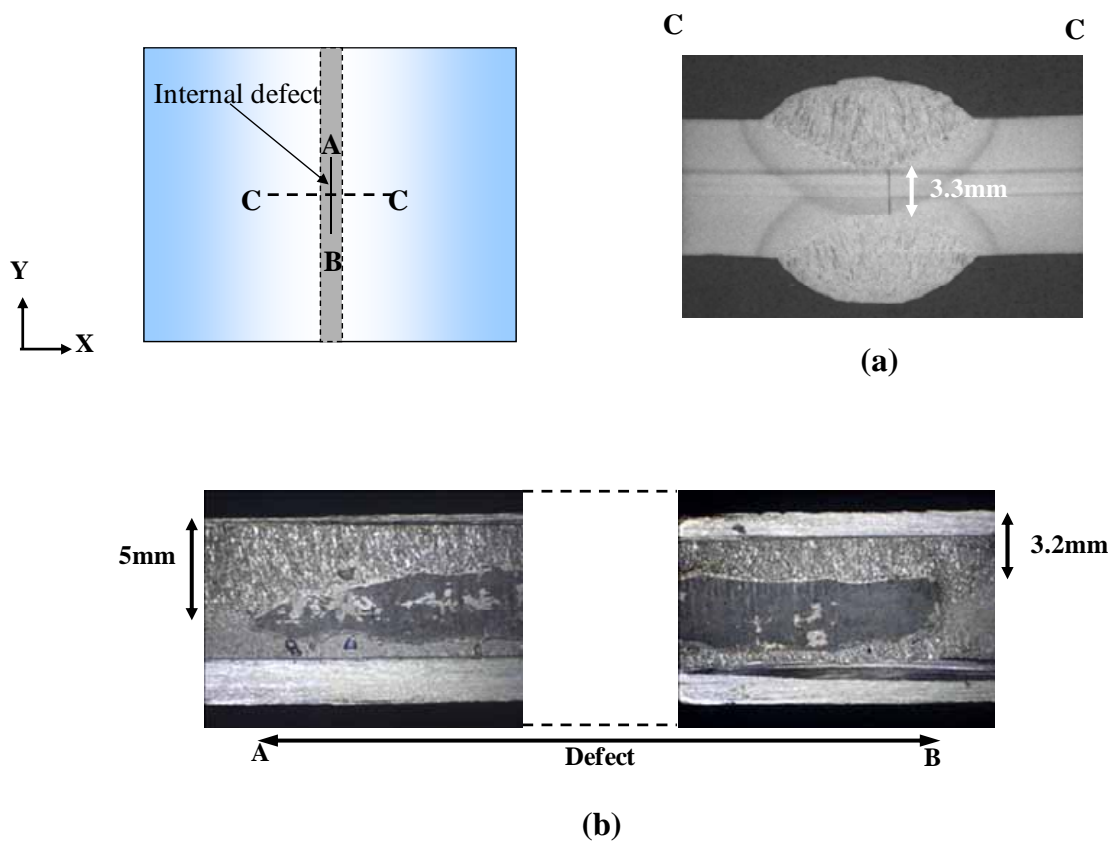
Cross-sectional configuration of the defect at the welding part, (a) across the welding part, (b) along the welding part.
